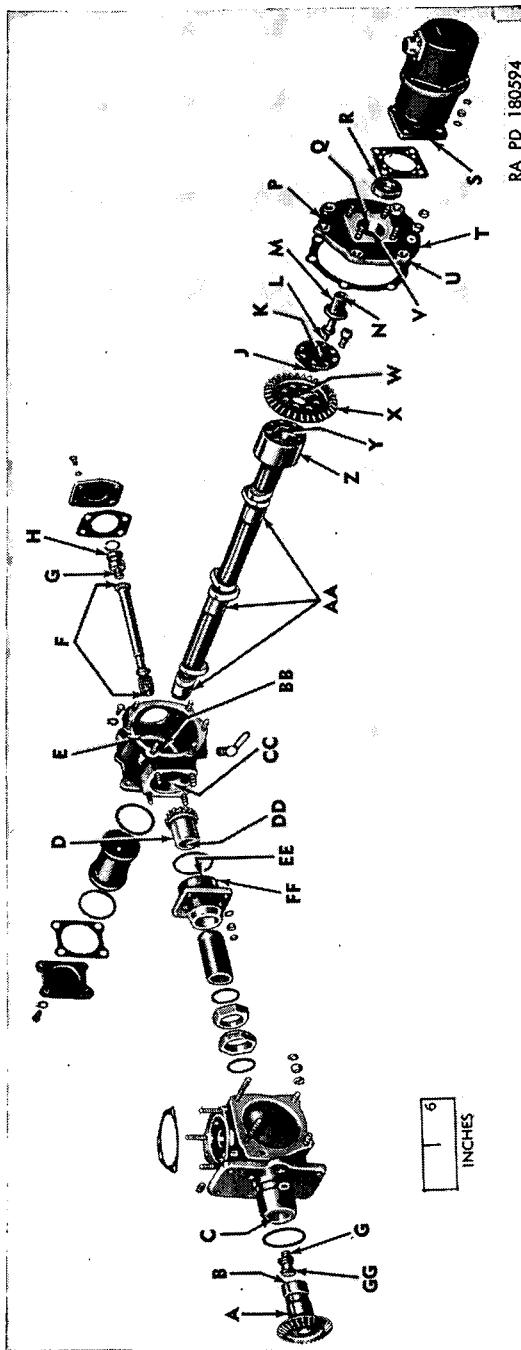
Repair and rebuild standard points of measurement for camshaft and drive, right (1-3-5) side.
